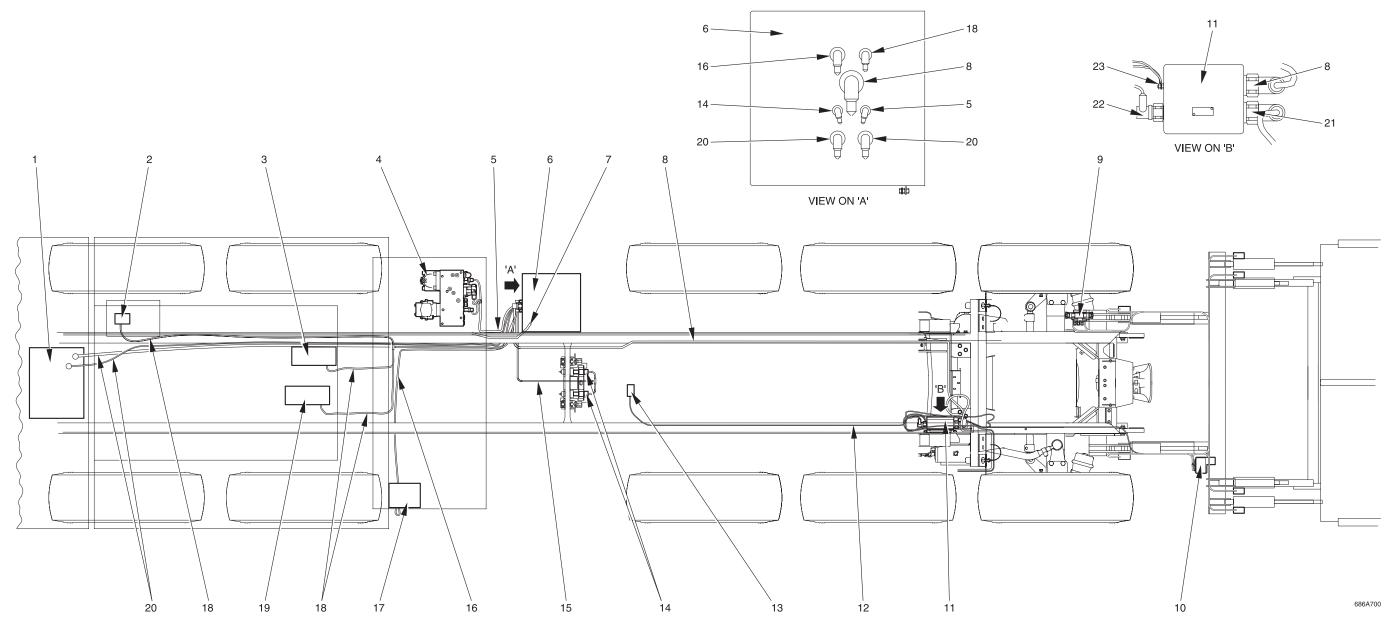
CHASSIS HYDRAULIC AND ELECTRIC ASSEMBLY LOCATIONS
